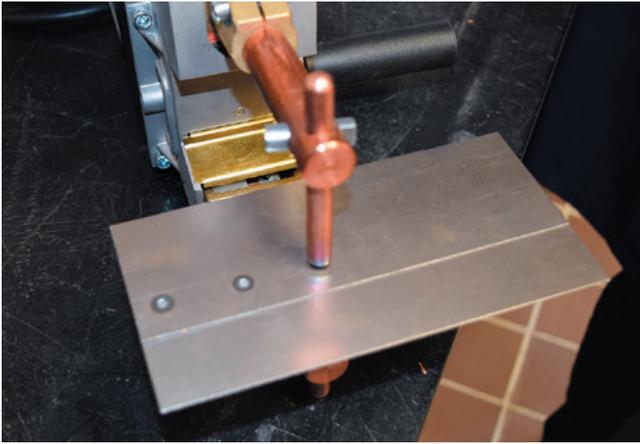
Each weld should be spaced no less than 25 mm apart.
